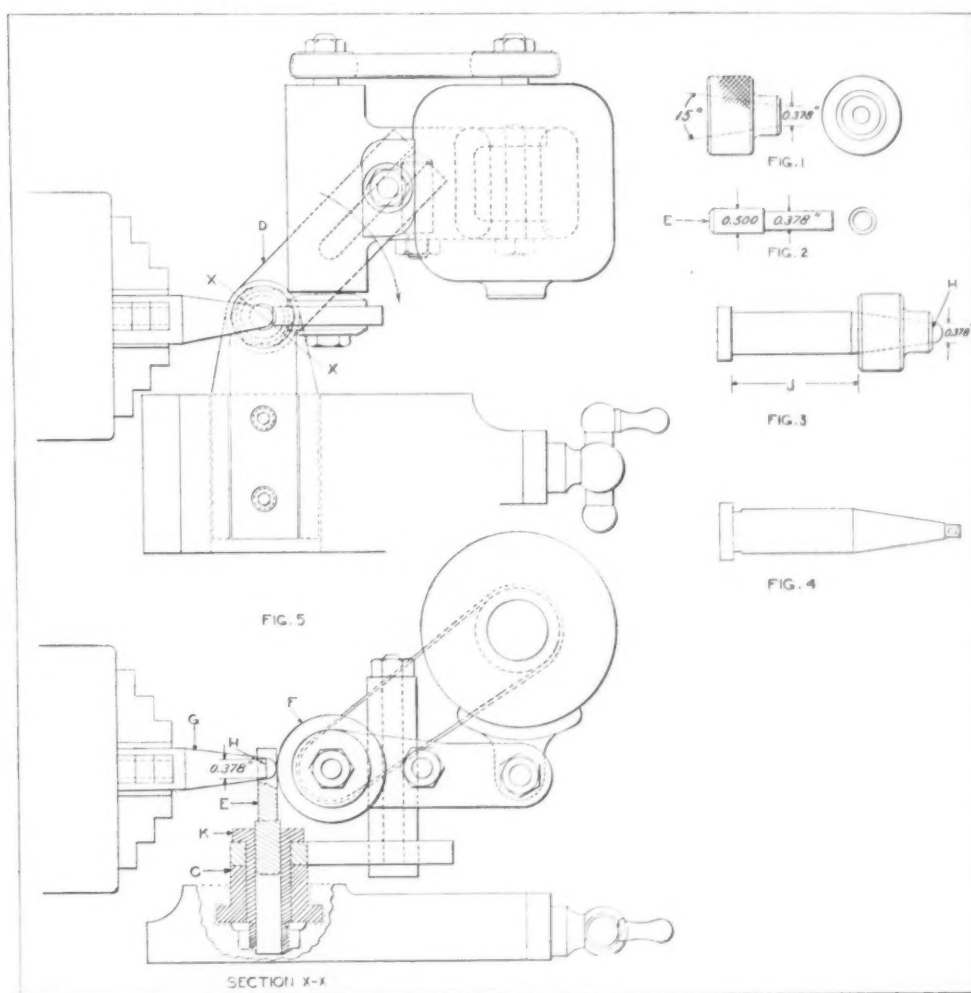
Gage Used in Grinding Spherical End on Tapered Piece *C*, Fig. 5. Fig. 2. Plug for Setting Grinding Wheel. Fig. 3. Gage Shown in Position on Tapered Piece. Fig. 4. Rough-machined and Hardened Piece. Fig. 5. Set-up for Grinding Spherical End on Tapered Piece
